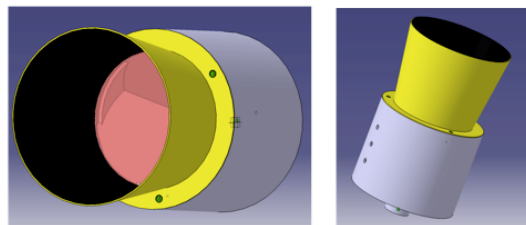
Drawing of assembled payload prototype: CCR (red), aluminum housing (grey), external conical solar shade (yellow).
